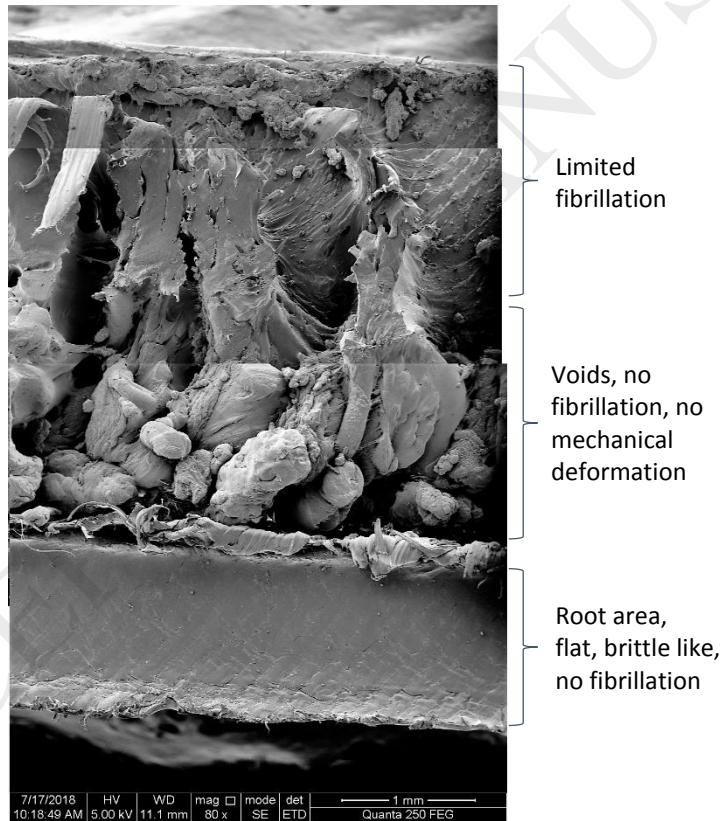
Macrostructure morphology of tensile fracture surface for sample 1 (welding conditions: 800rpm, 20mm/min, 4.1mm depth.)
